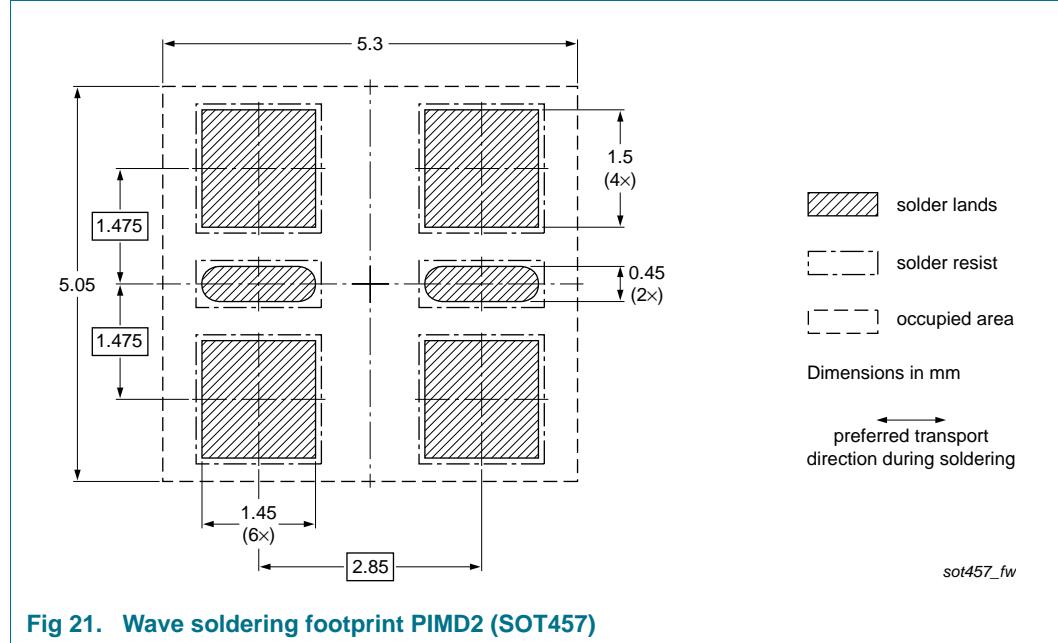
Wave soldering footprint PIMD2 (SOT457)
